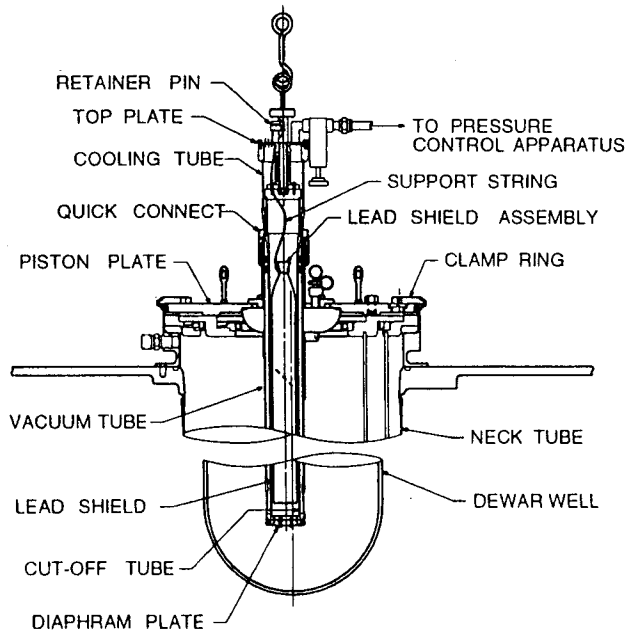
Cooling tube and lead shield fully installed through hole cutter assembly into the dewar.
